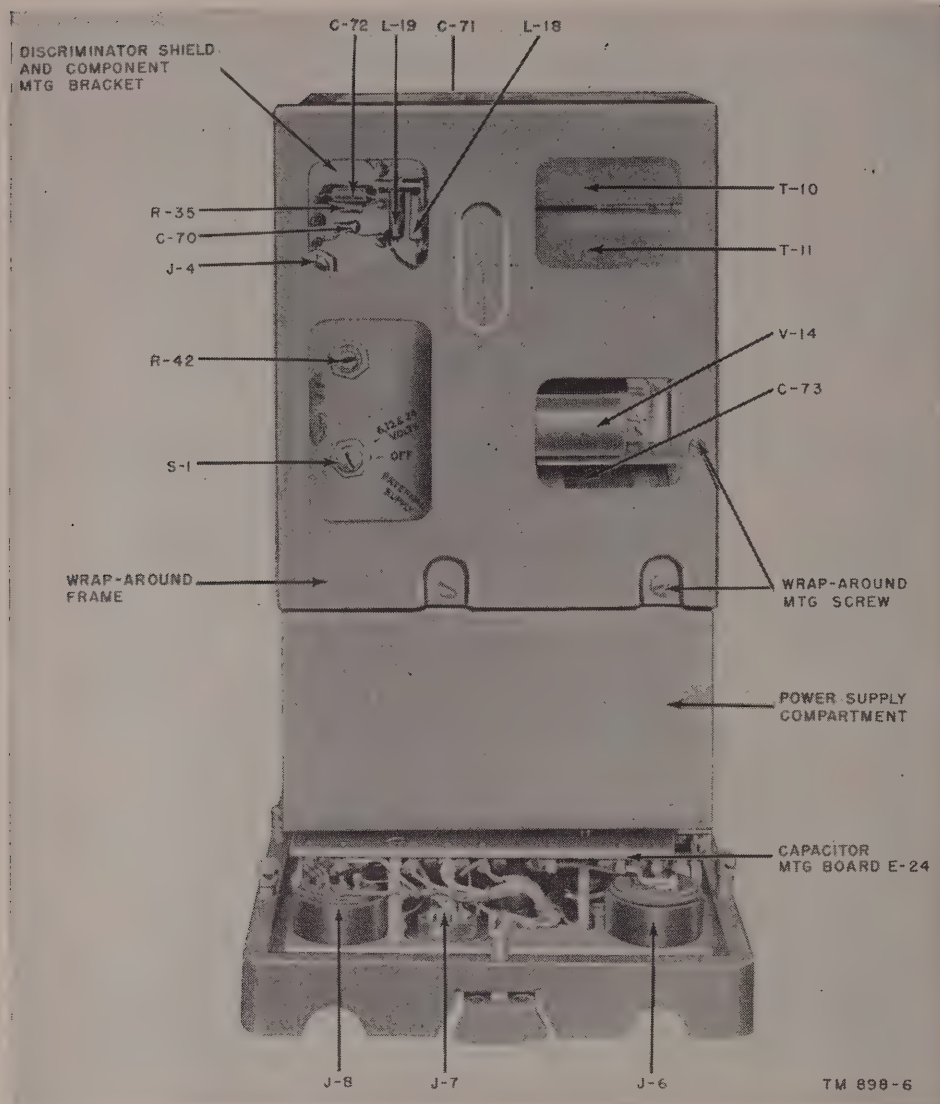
Auxiliary receiver panel-chassis assembly, bottom view.
